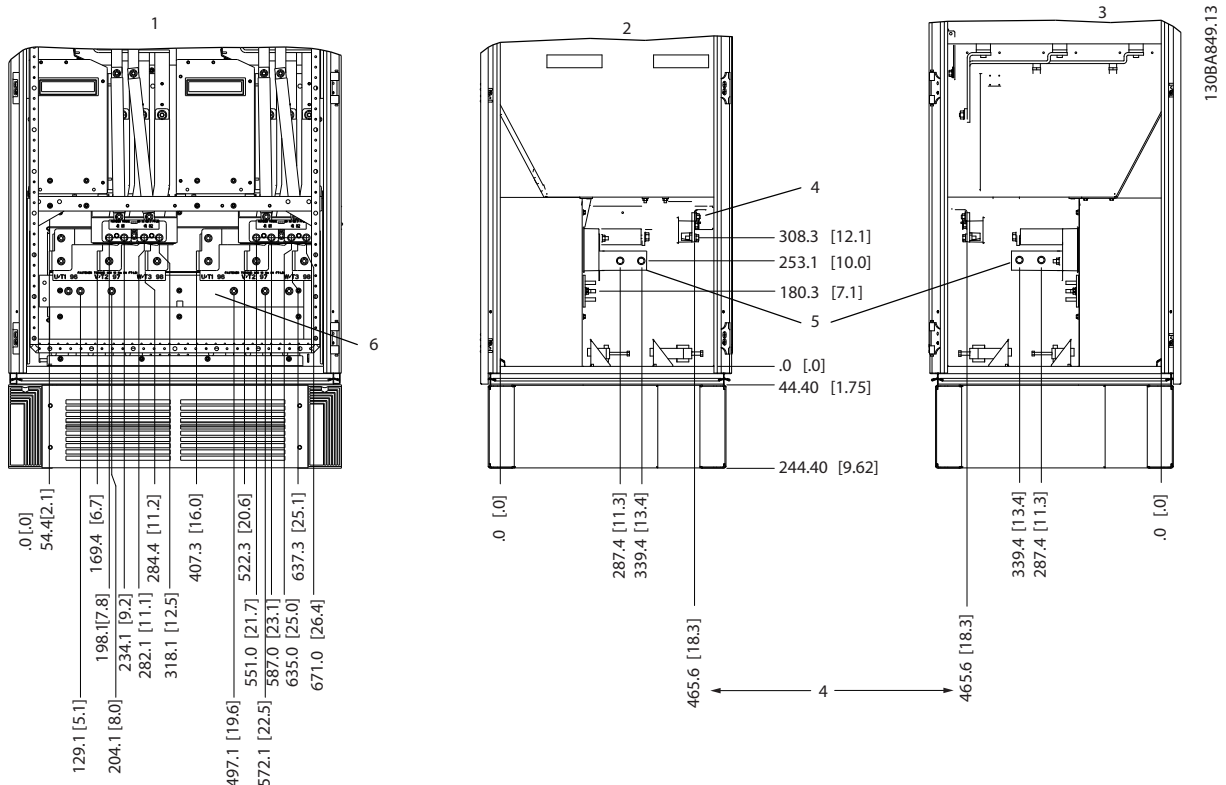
Terminal locations - Inverter Cabinet - F1 and F3 (front, left and right side view). The gland plate is 42 mm below .0 level.
